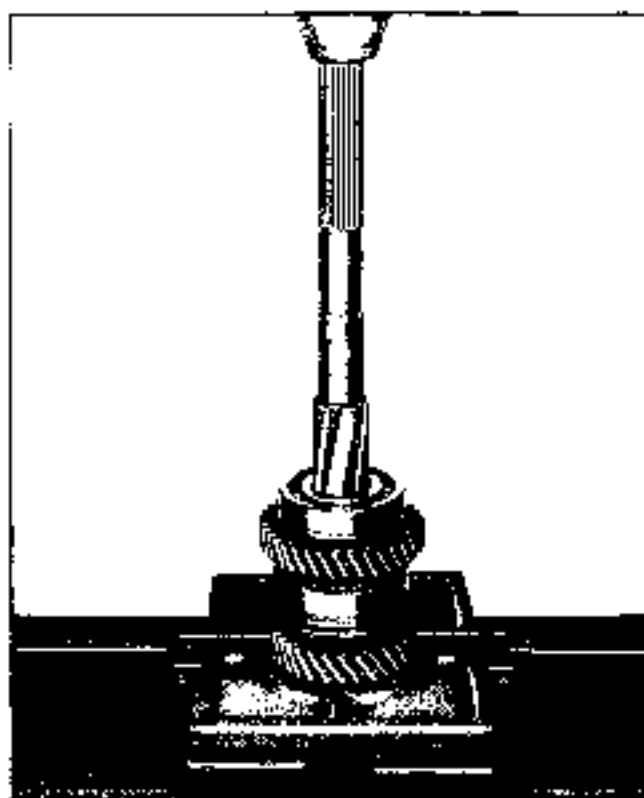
D-16 Pressing Mainshaft from First and Second Speed Gears
